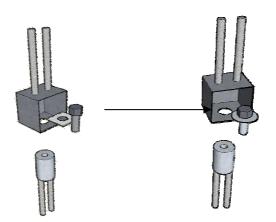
Sketch of floor-to-wall connection, before and after part reduction.
